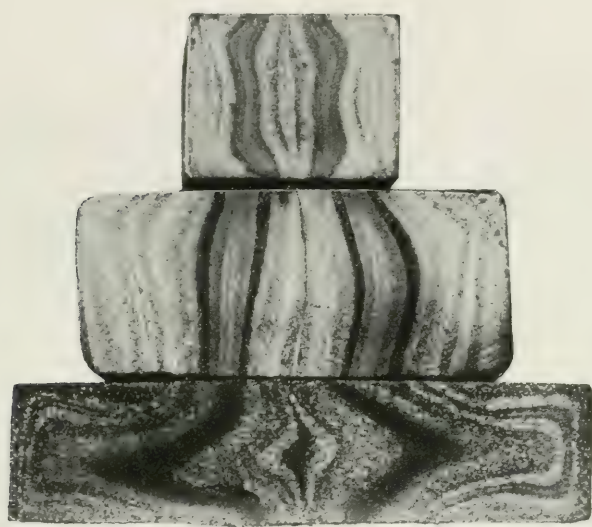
Various sections of steel which have been welded and then pressed flat to determine the quality of the welds.
